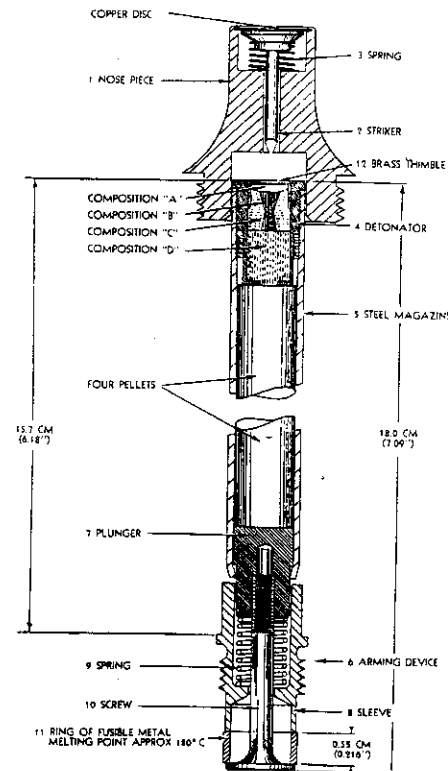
Internal arrangement of fuze system in 8-cm HE projectile.
